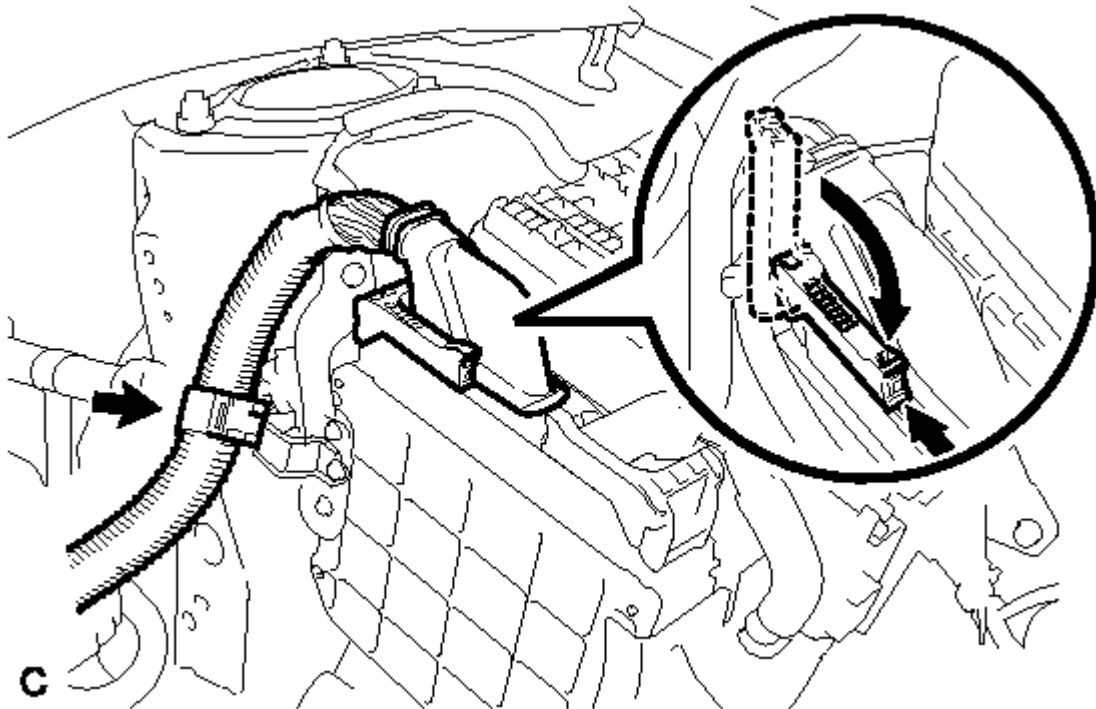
Location of Engine Control Computer With Clamp And Lock Lever
